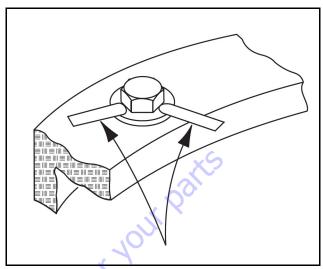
Swing Bearing Bolt Feeler Gauge Check
